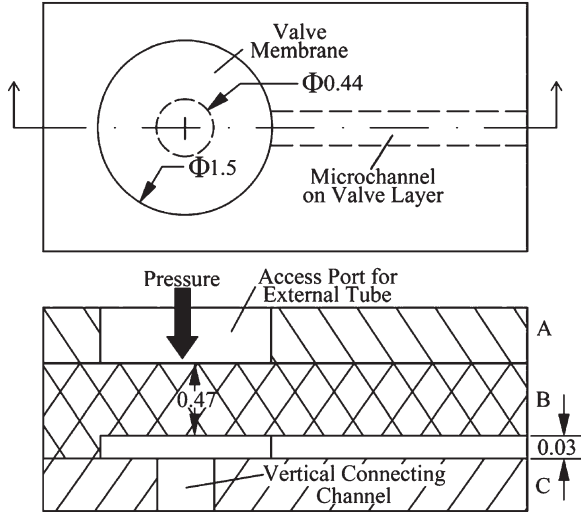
Structure of pneumatic valve (Unit: mm). A: vacuum generator layer, B: valve layer, C: flow sensor layer.
